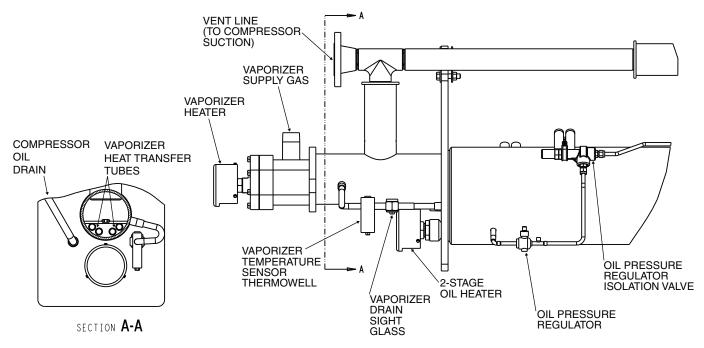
Oil Reclaim Cross Section (Q, R Compressors Shown)
